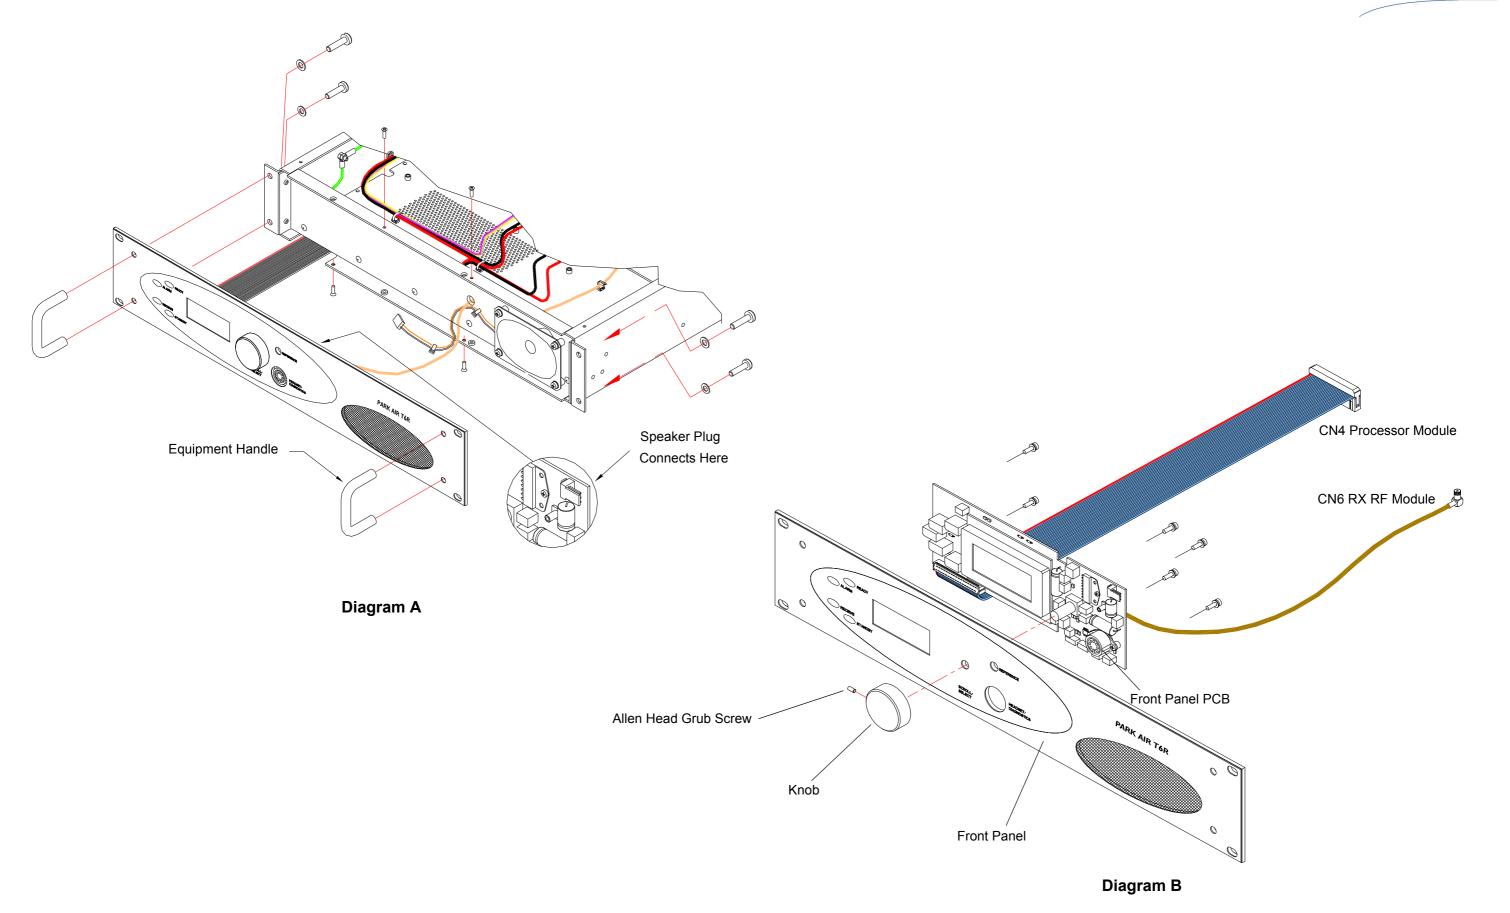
Front Panel Assembly PCB - Removal and Refitting Detail
